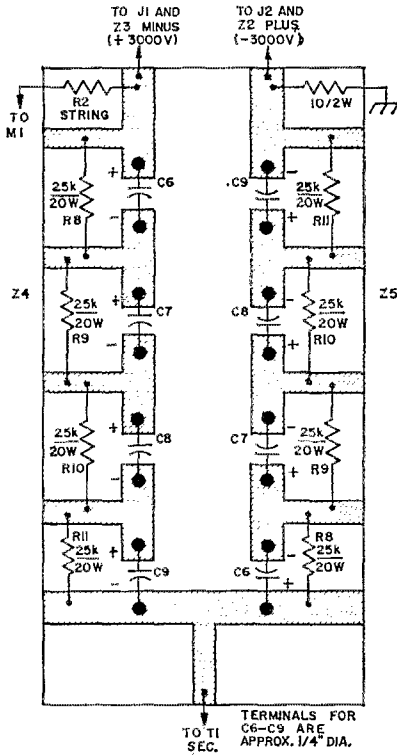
Layouts for the circuit boards used at Z_2 through Z_6 . To assure good insulating properties high-quality glass-epoxy board should be used.
